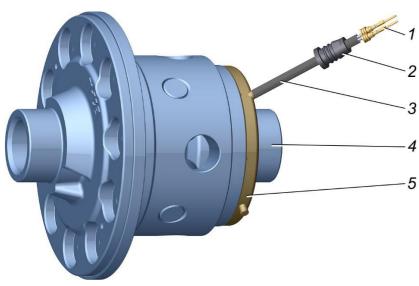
Locking differential with electric locking control: 1 – wiring harness contacts; 2 – wiring harness seal; 3 – differential solenoid wiring harness; 4 – differential; 5 – solenoid
